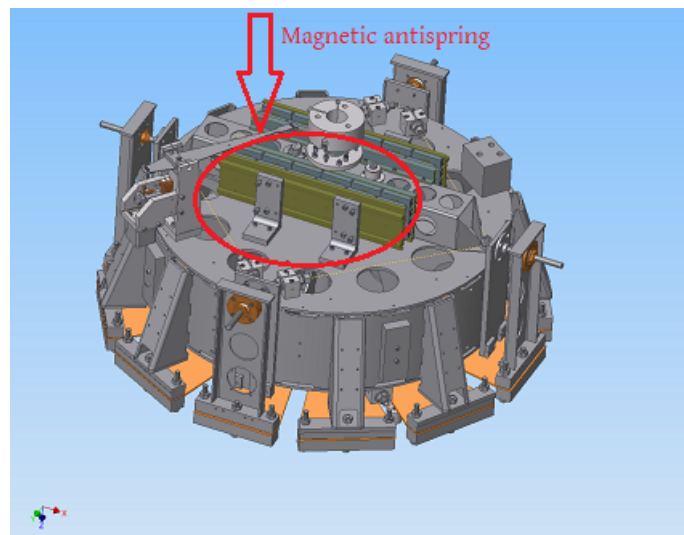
A 3D technical drawing of a standard filter where the magnetic anti-springs are visible (within the red circle) together with the fishing rod actuator .
